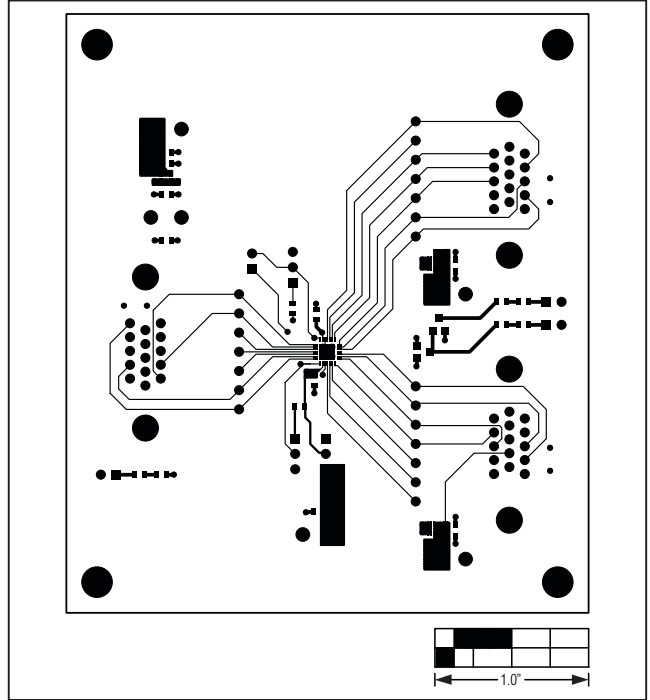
MAX4885AE EV Kit PCB Layout—Component Side
